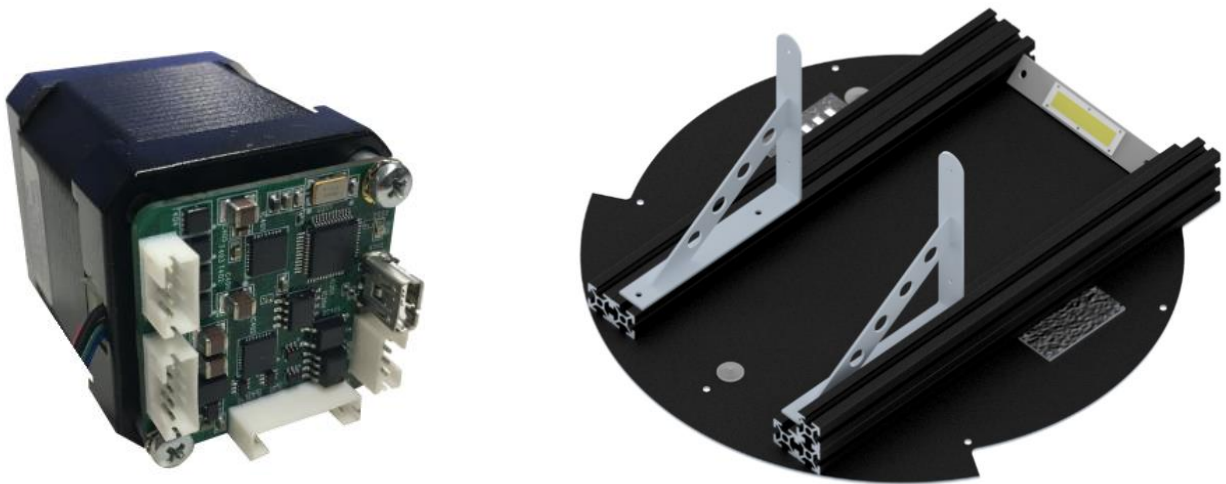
Stepper motor PD42-3-1141 from Trinamic (left); rotateable mounting plate (right)
